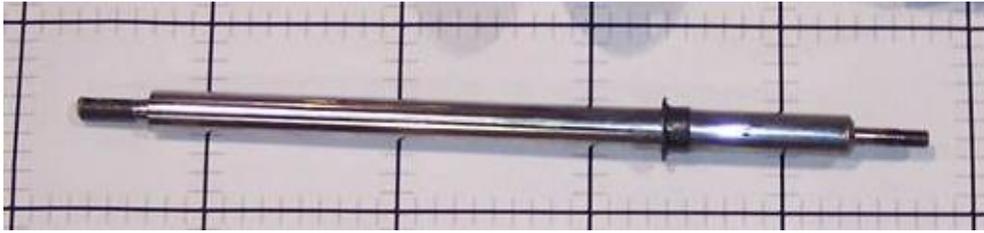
Rear & Front Strut Piston Shaft Current Component Example
